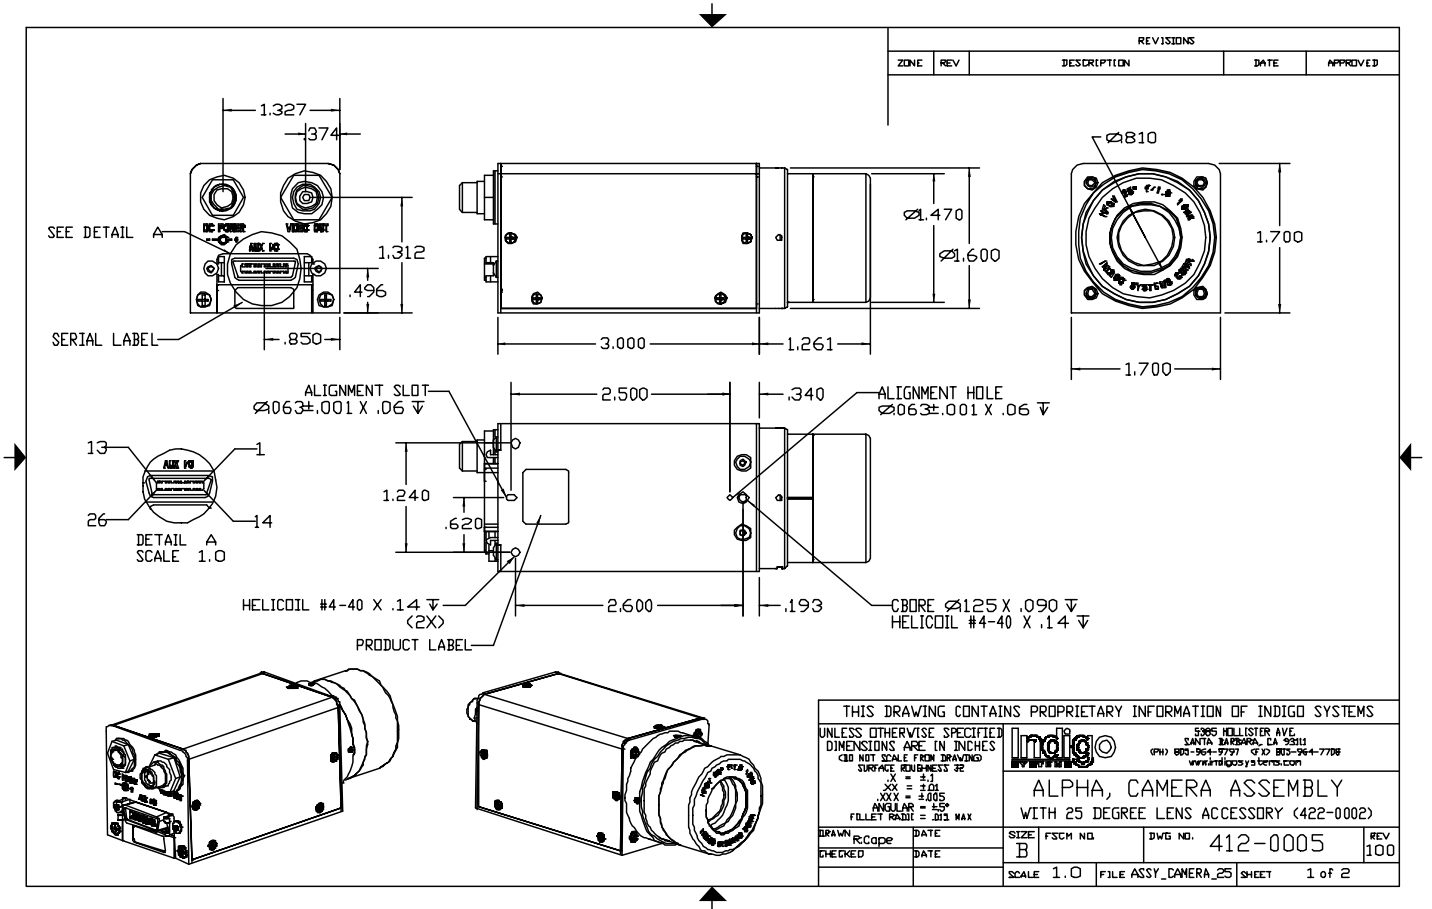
Opto-Mechanical Interface Drawing (25° FOV Lens)
